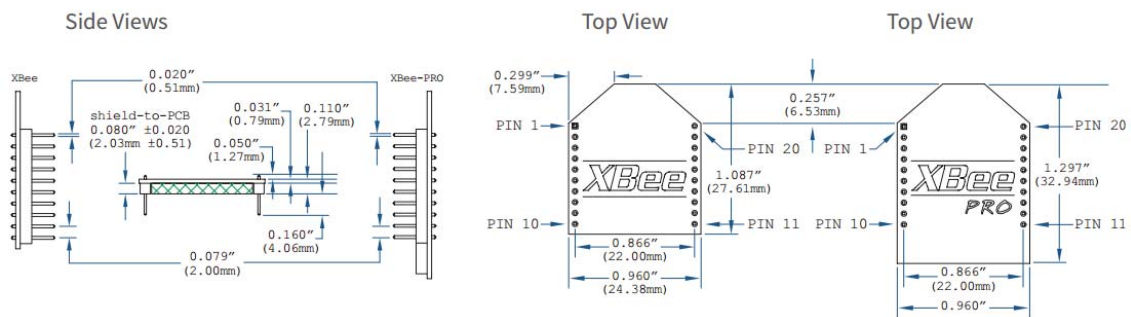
XBee-PRO mechanical drawing (image from [7]).
